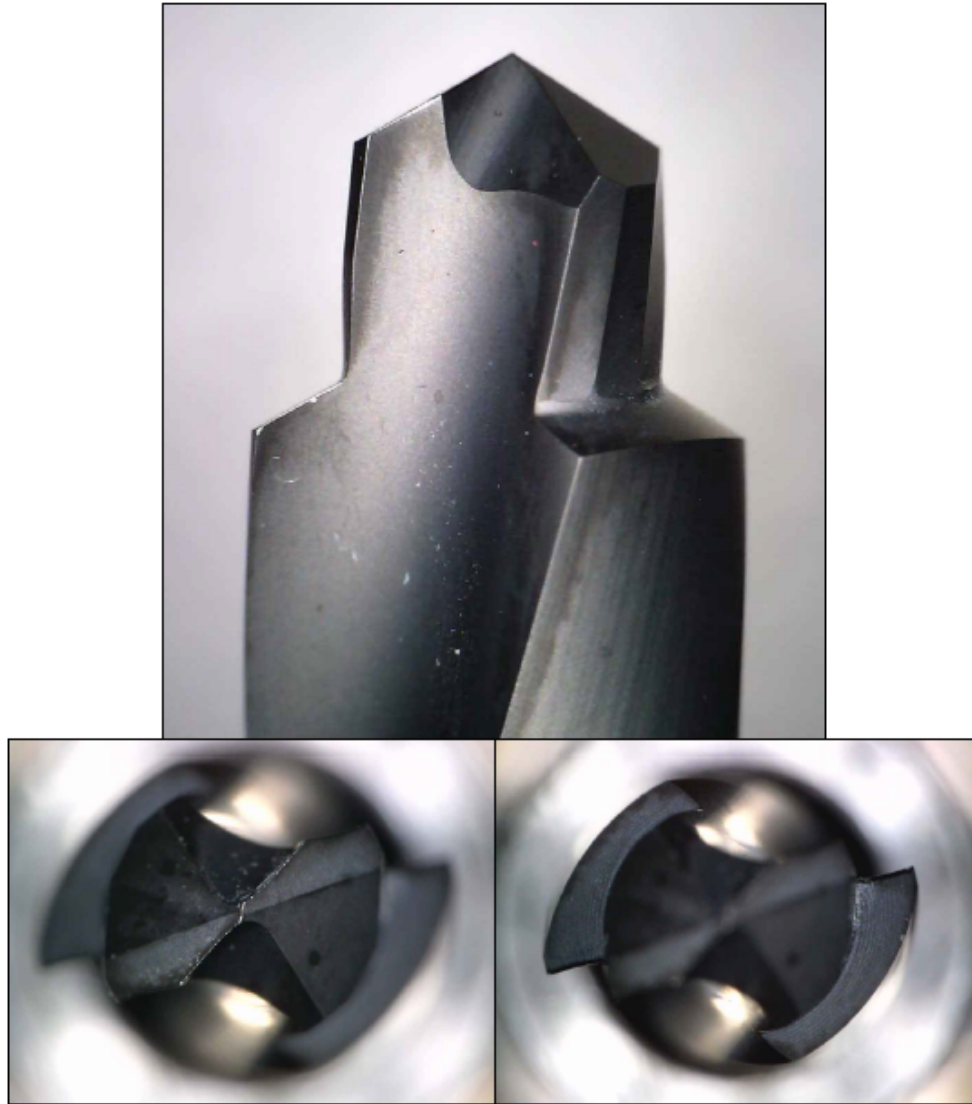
Coated tool after 55 + 55 drills using semi-automatic machine with new parameters.
